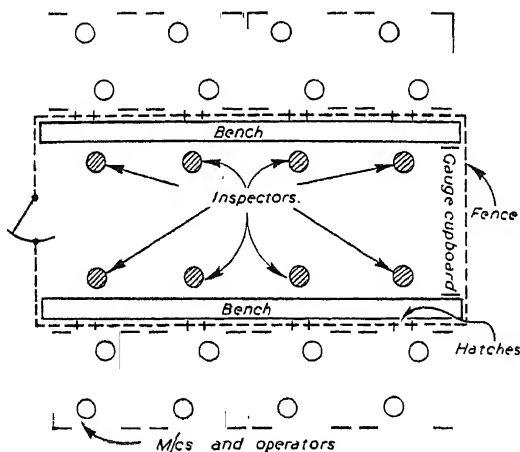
Diagram showing arrangement for cage inspection system.
